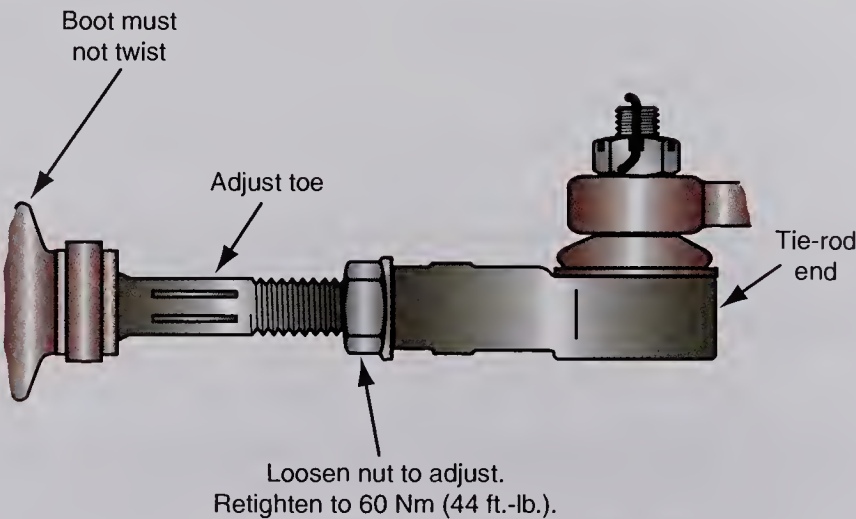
Rotating tie-rod to adjust the toe on a rack and pinion steering gear.
